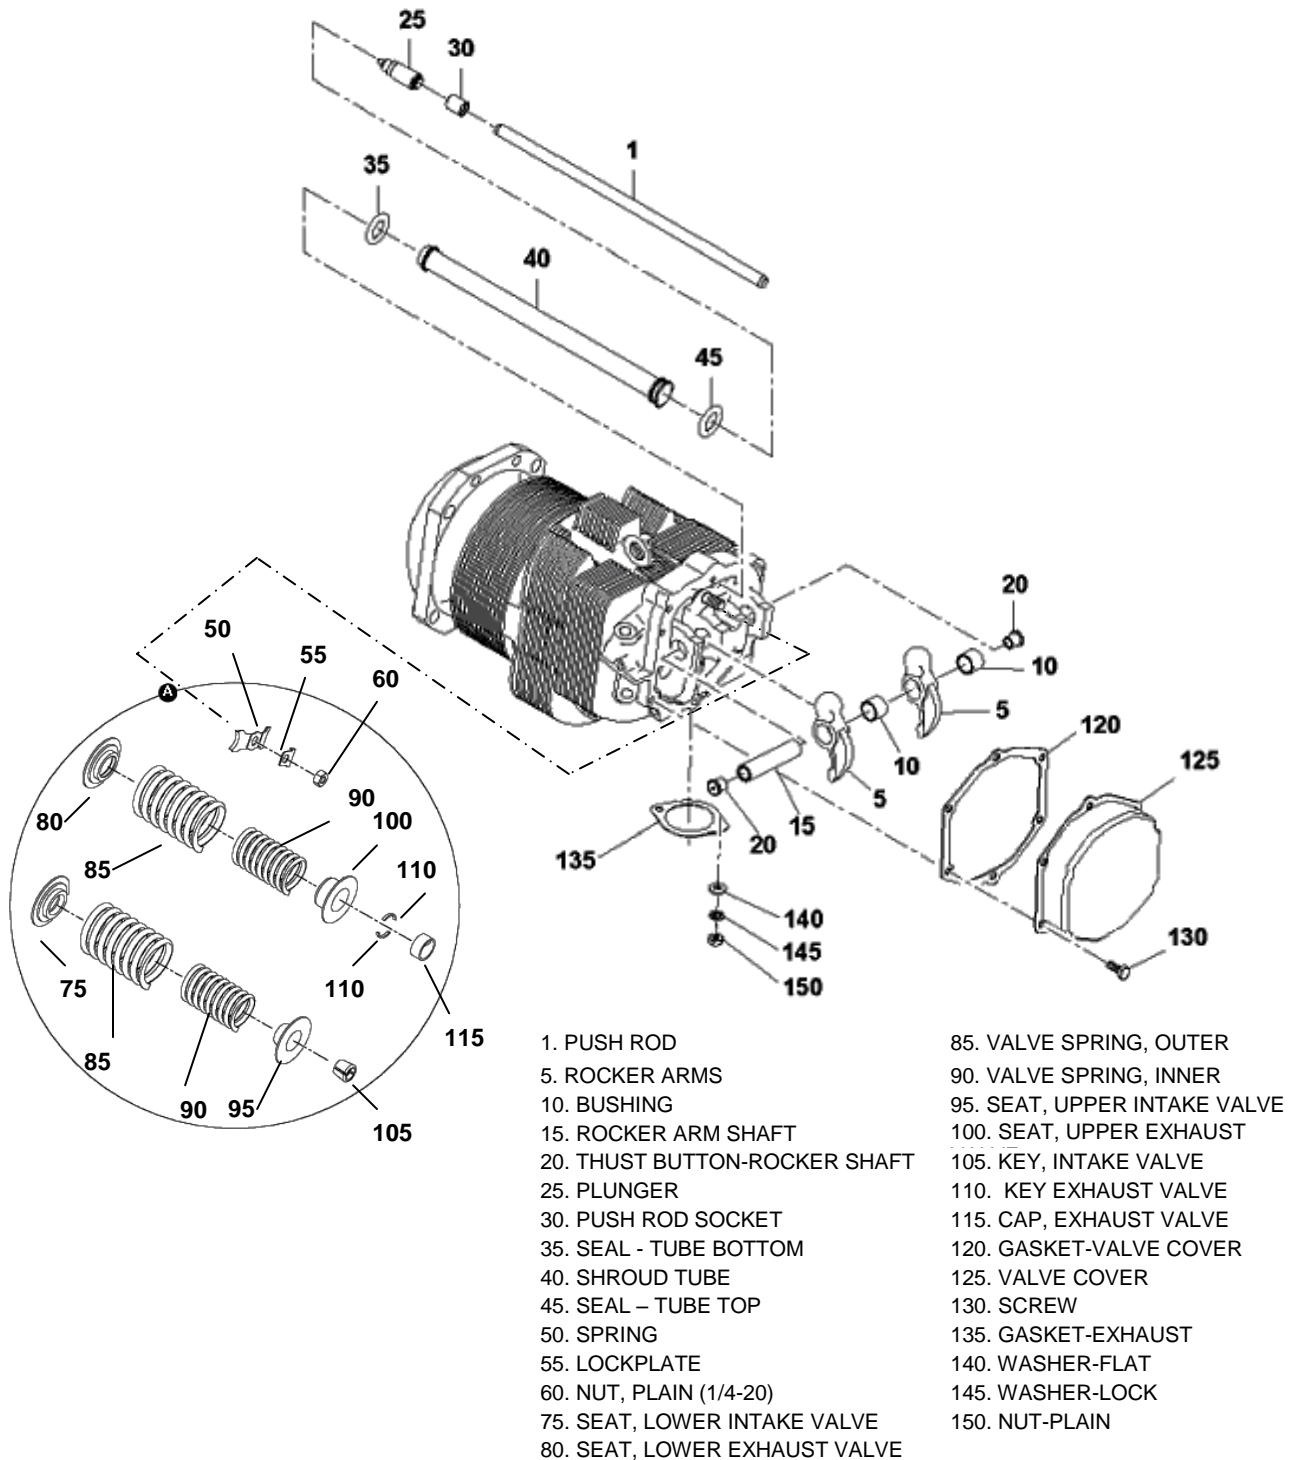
• Cylinder Valve Train and Spring Assembly
